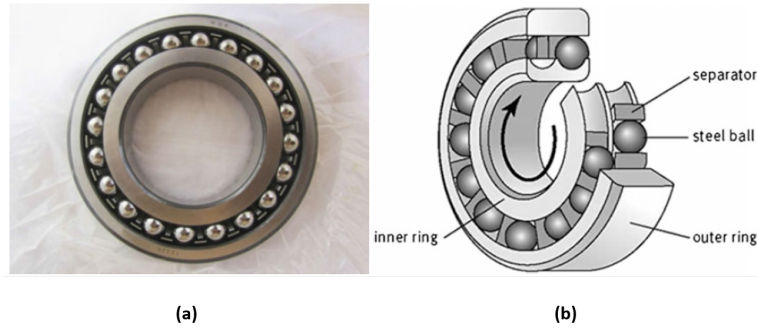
Typical ball bearings: (a) Real bearing; (b) Dissected ball bearing [5].
